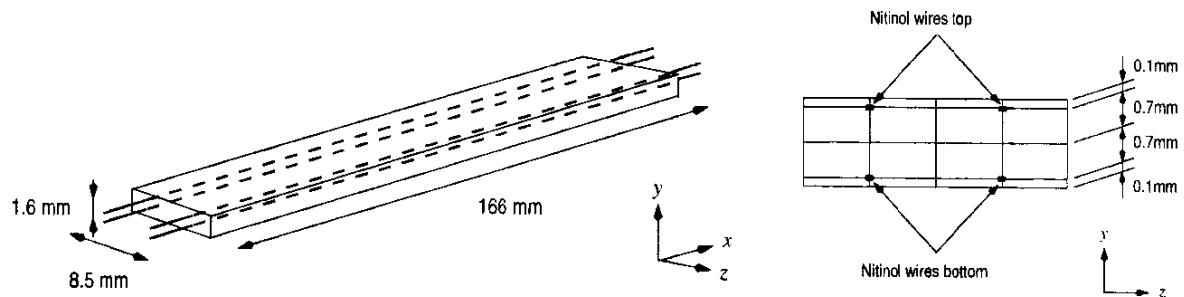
Left: flexible SMA composite beam. Right: cross-section
